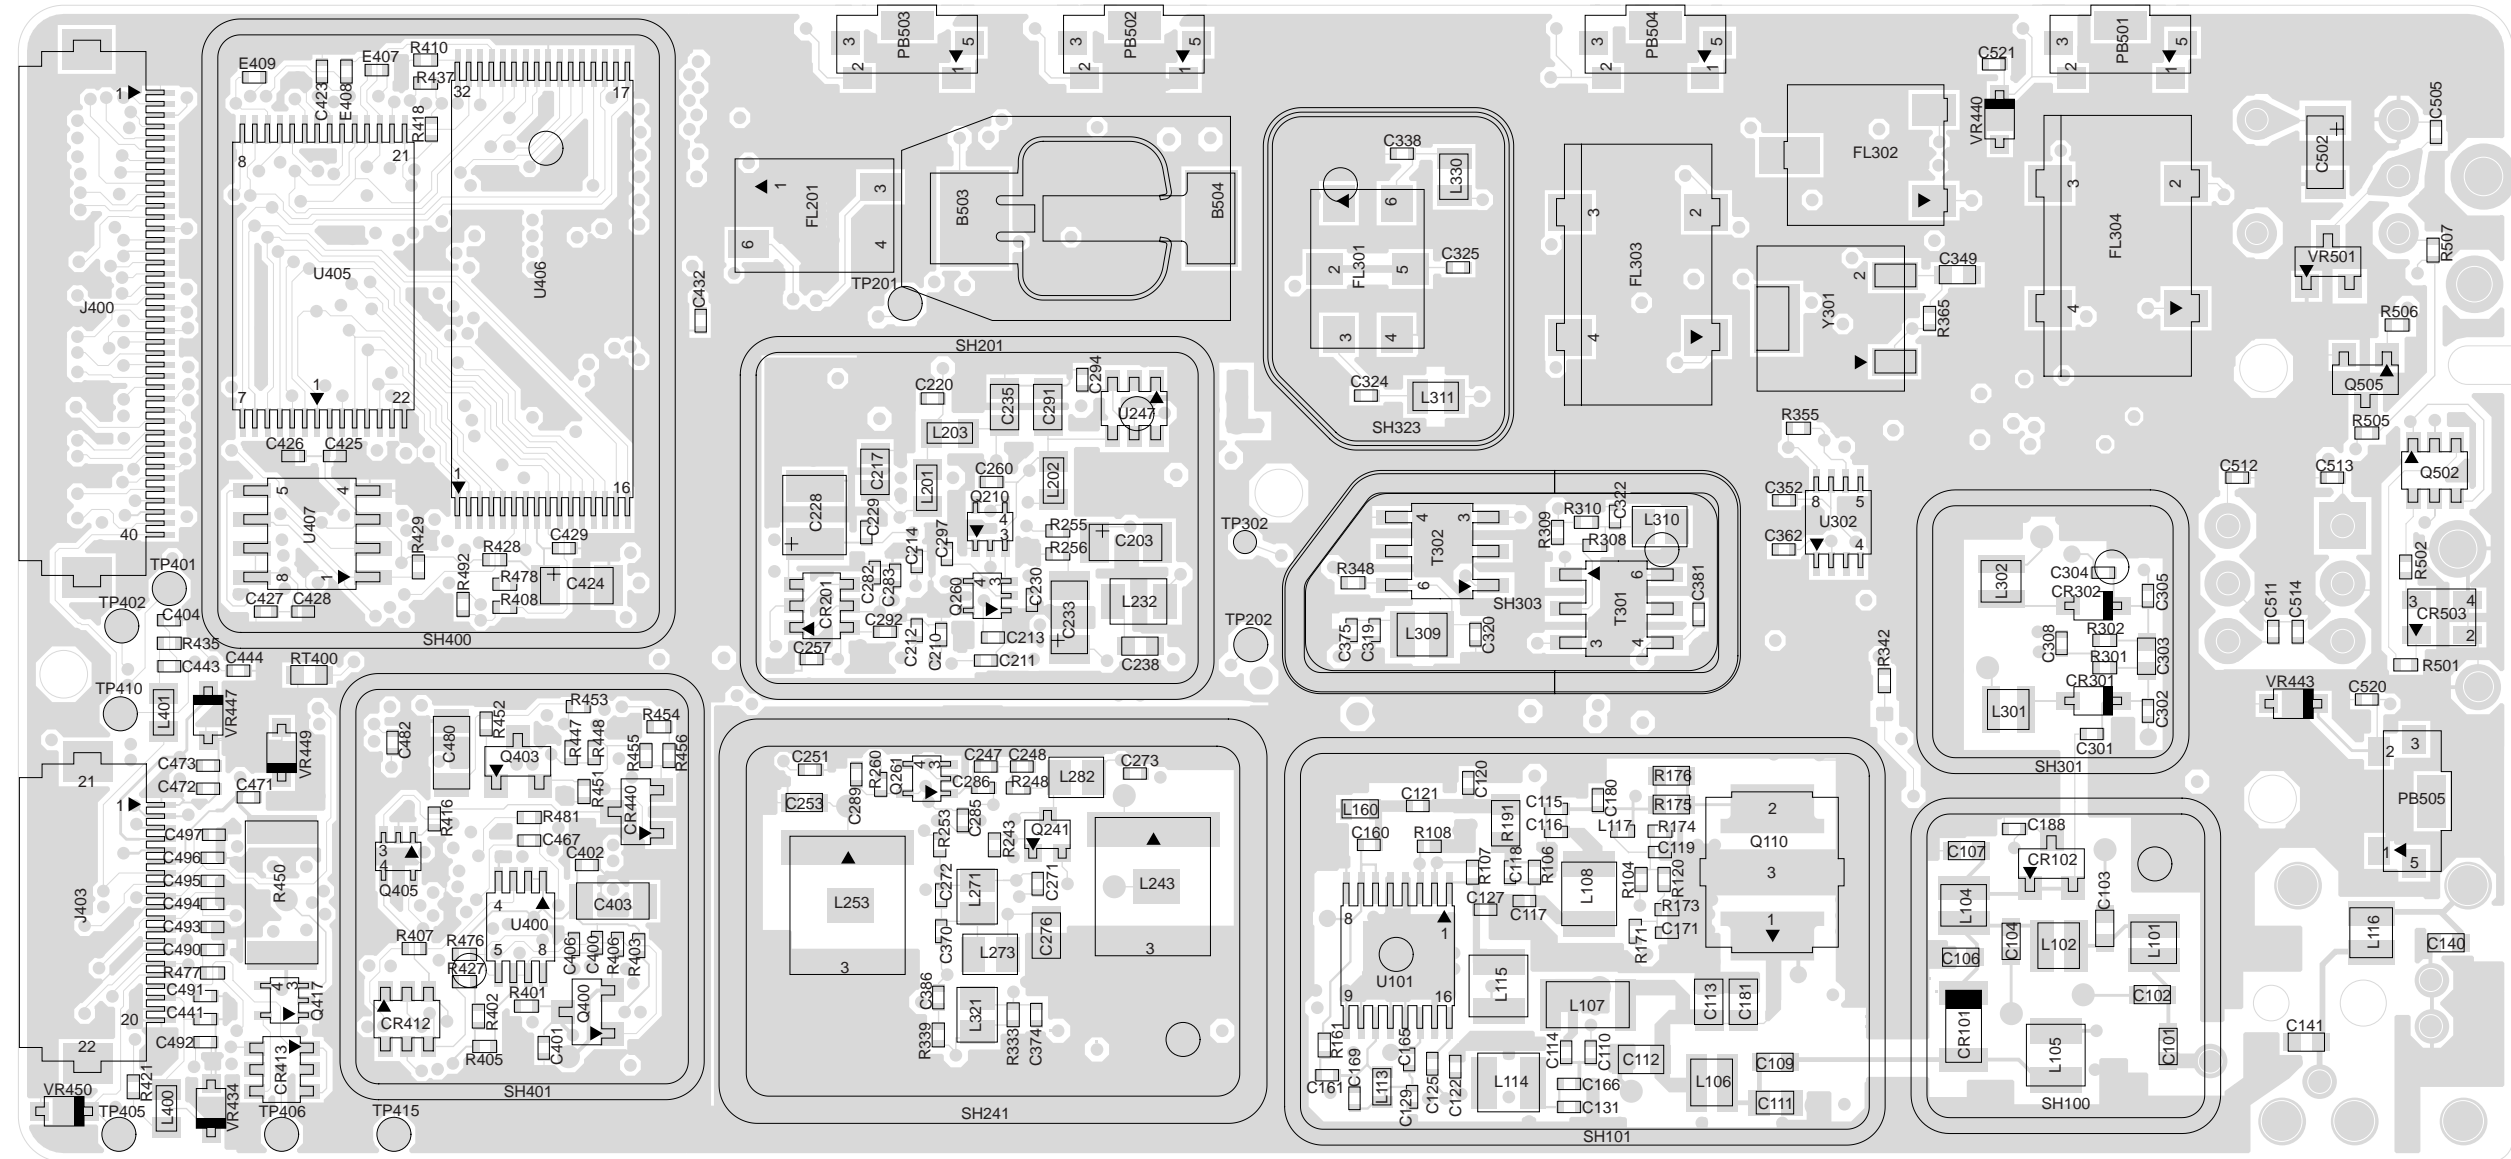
UHF (450-527 MHz) 5000/7000 Series Main Board Top Side PCB No. 8486686Z02
